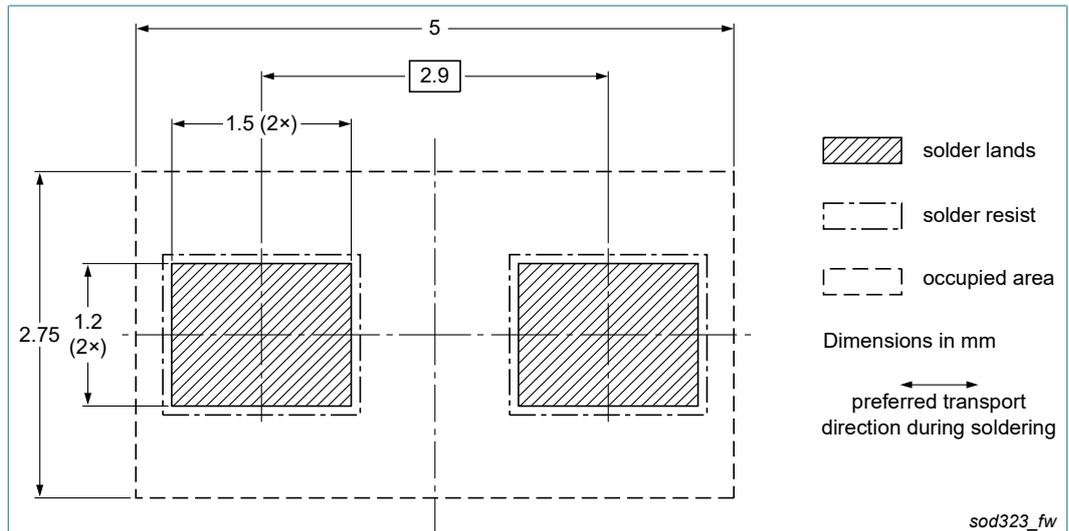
Wave soldering footprint for SOD323 (SC-76)
